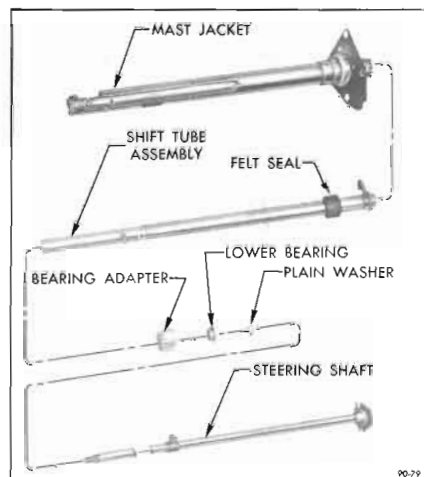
Disassembly of Lower Portion of Automatic Transmission Mast Jacket (All Series)
